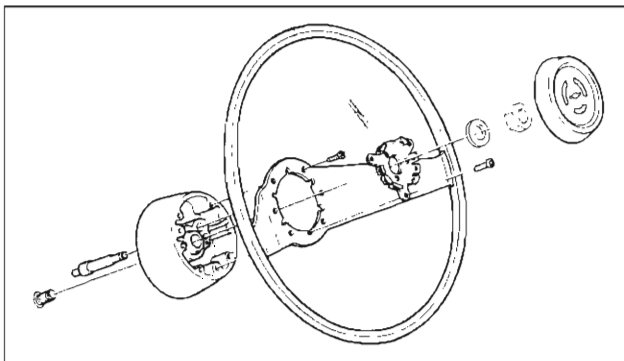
Simulated Wood Steering Wheel and Attaching Parts
